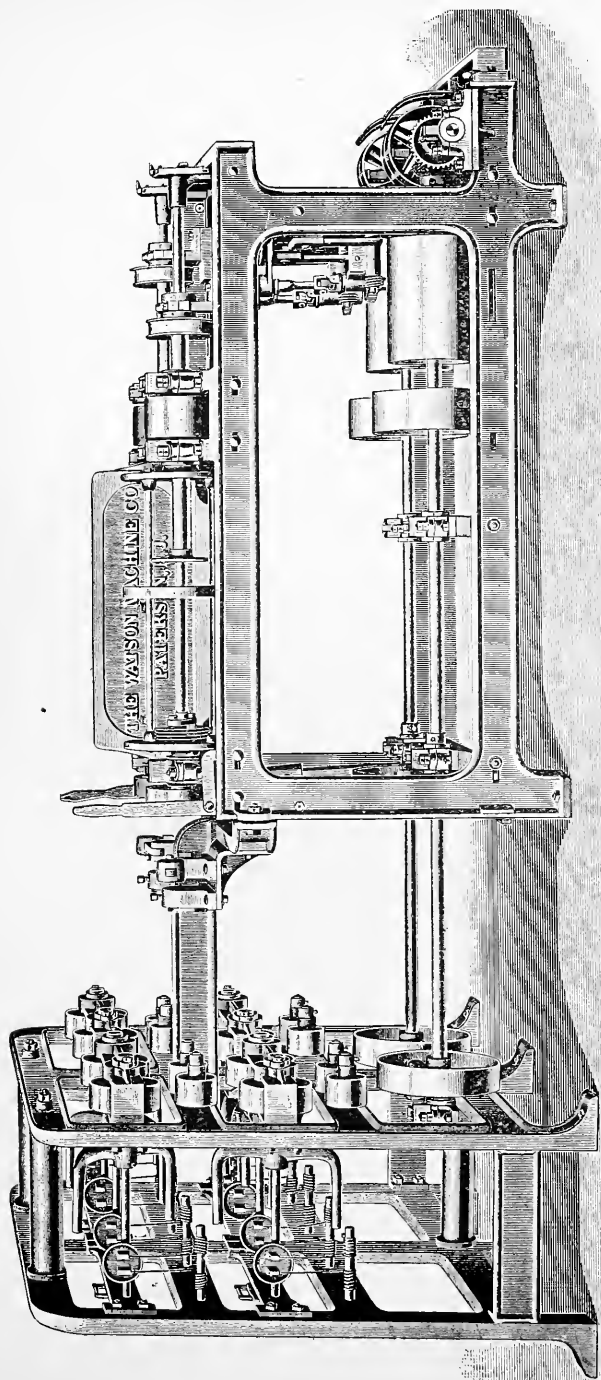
A 2-spindle machine to lay 2-, 3- or 4-ply cord. (Made by the Watson Machine Co., Paterson, New Jersey.)
